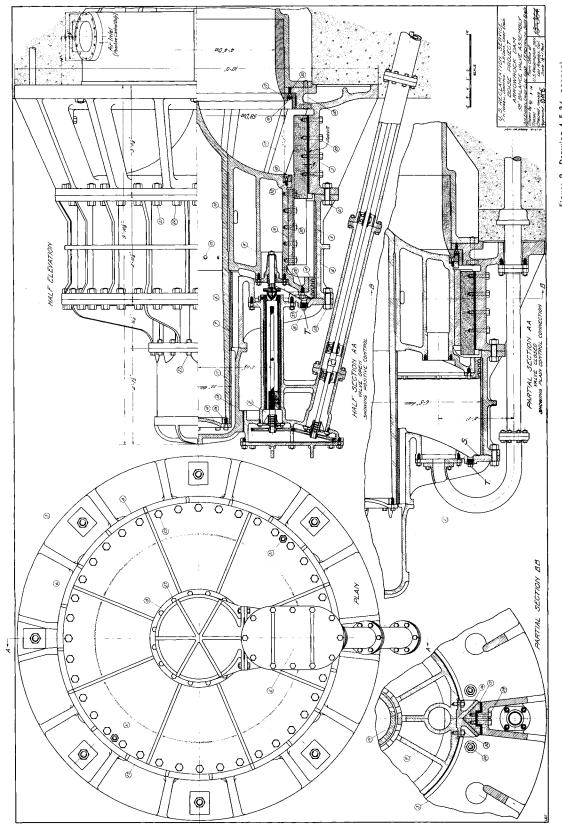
Drawing 4-E-36, general assembly of 58-inch ensign valve.
